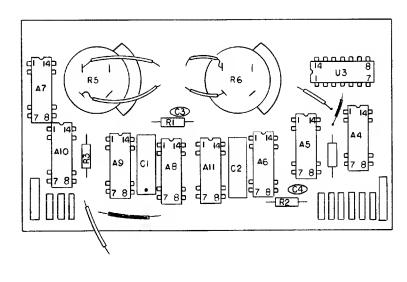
A18 IEEE-488-1975 Switch PCB Assembly, -15 Option
